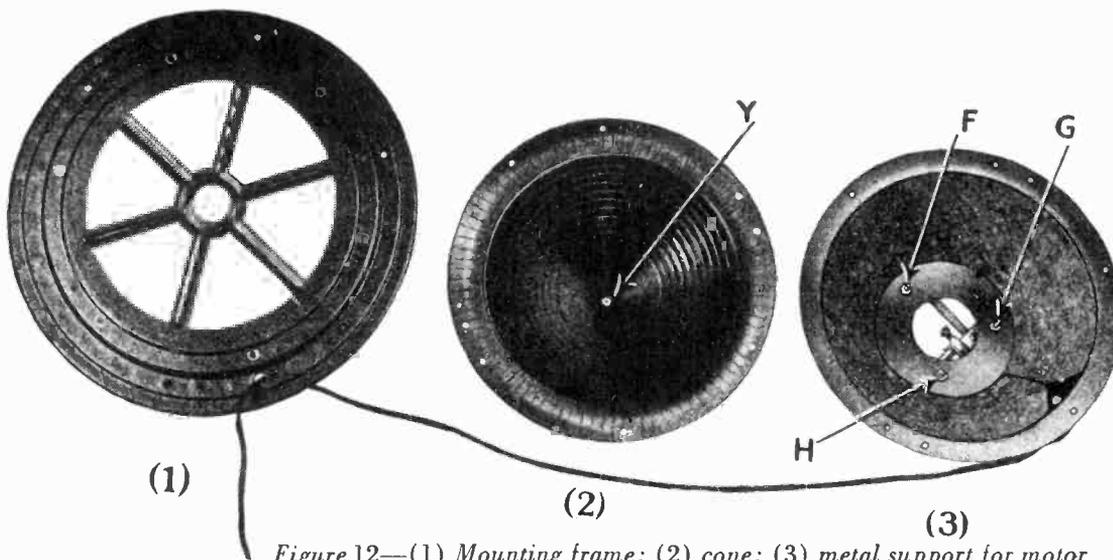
(1) Mounting frame; (2) cone; (3) metal support for motor
